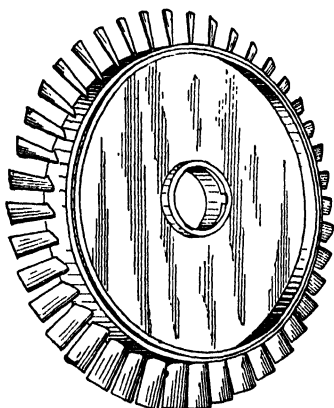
Rotor disk and blades of an axial-flow compressor.
